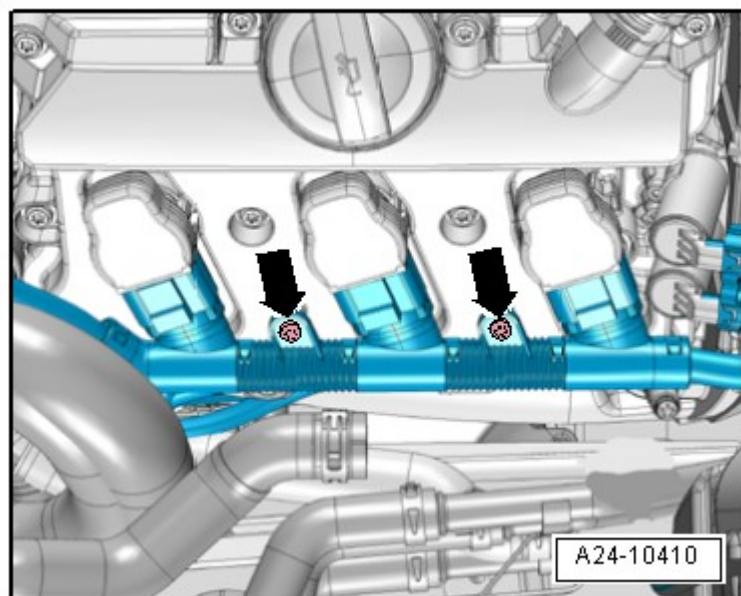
Identifying Screws From Ignition Coil Wiring Harness
